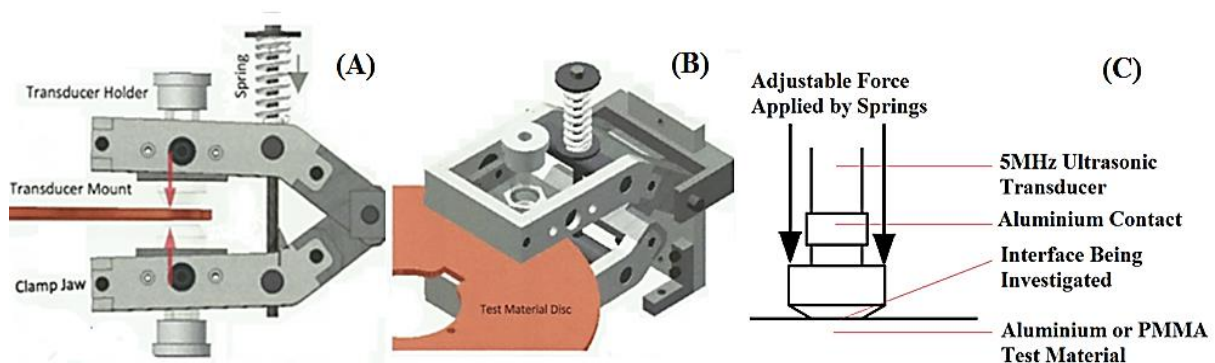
(A) and (B) CAD models of the pivoting threaded clamp system used to ensure best alignment of the two contacts with the rotating test material disc. (Murray, et al., 2012). (C) Simplified schematic of the contacting interface being investigated
